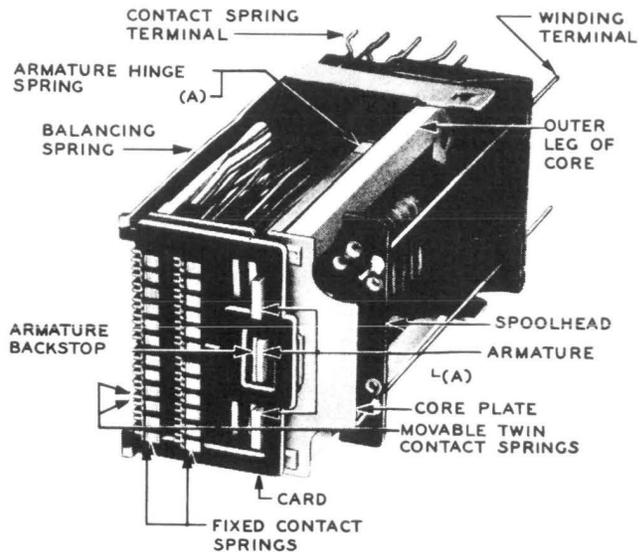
General View of AJ-type 24-position Relay - Contact Cover Removed
